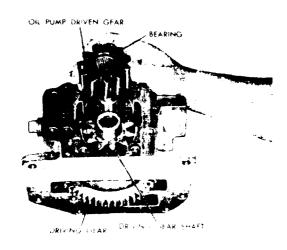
C-30. Removing (or Installing) Oil Pump Driven Gear
